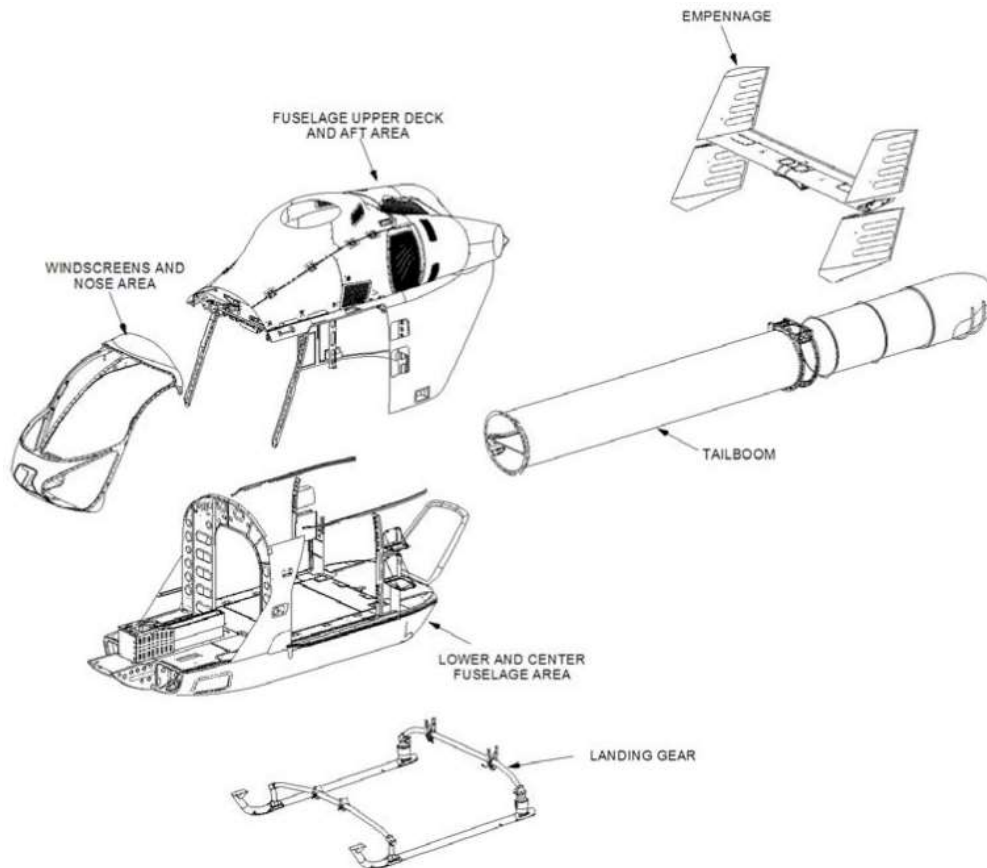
MD 902 Explorer Main Fuselage Assembly Sections, Source: MDHI, p.22.
